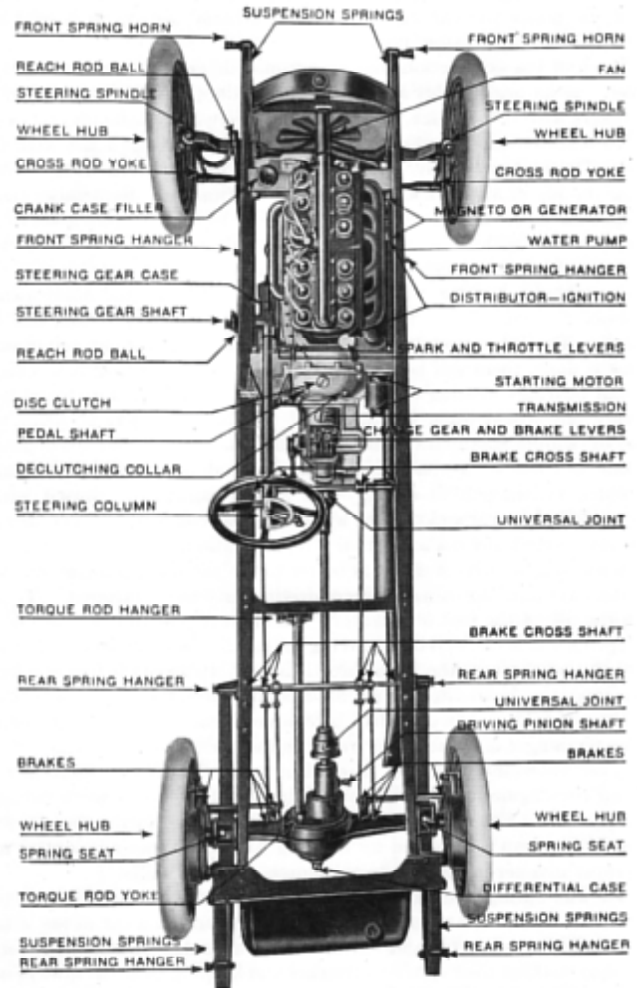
Chassis lubricating chart. (The Tide Water Oil Company.)
